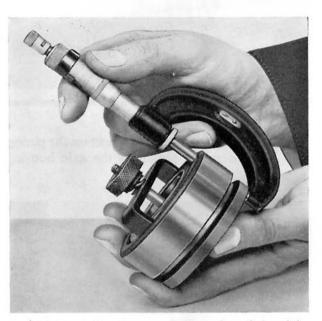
Measuring the overall dimension of the pinion rear bearing and jig plate
